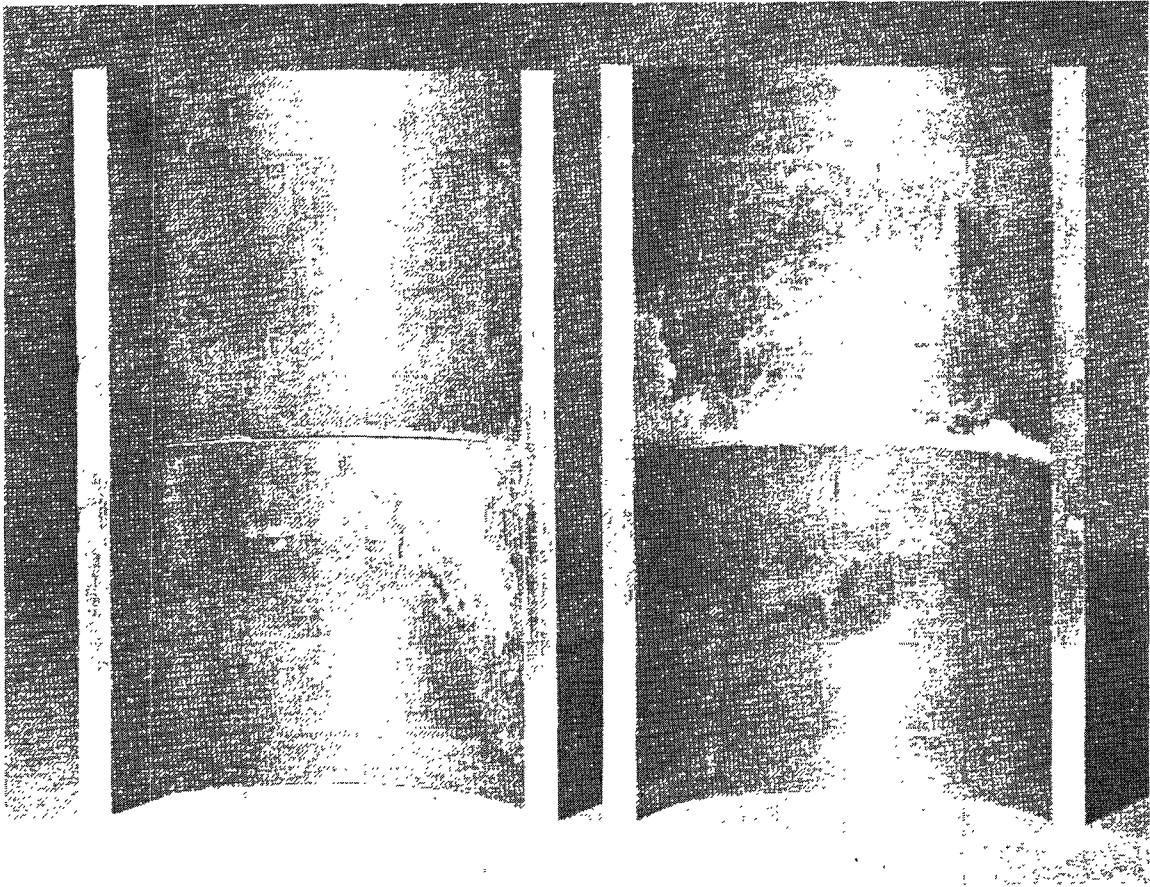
The open crack on the left side of this defective joint caused the reflection shown in Fig. 4. The discoloration is smooth solder.
